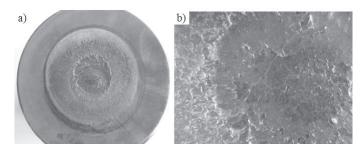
Worn out punch for taper forging after 14 thousand forgings: a) macro view, b) magnification showing thermal-mechanical wear of most degraded front part of tool
